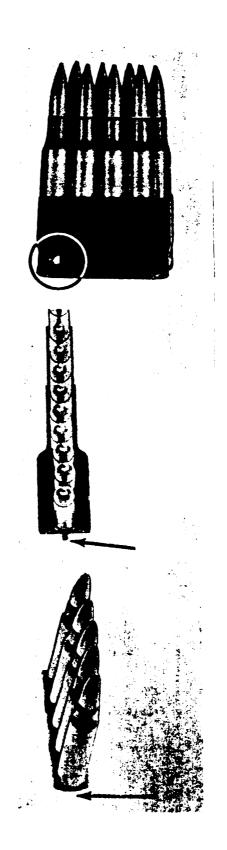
Clip Package Defect No. 3-Rusty, Excessively Oiled or Otherwise Defective Clips.
